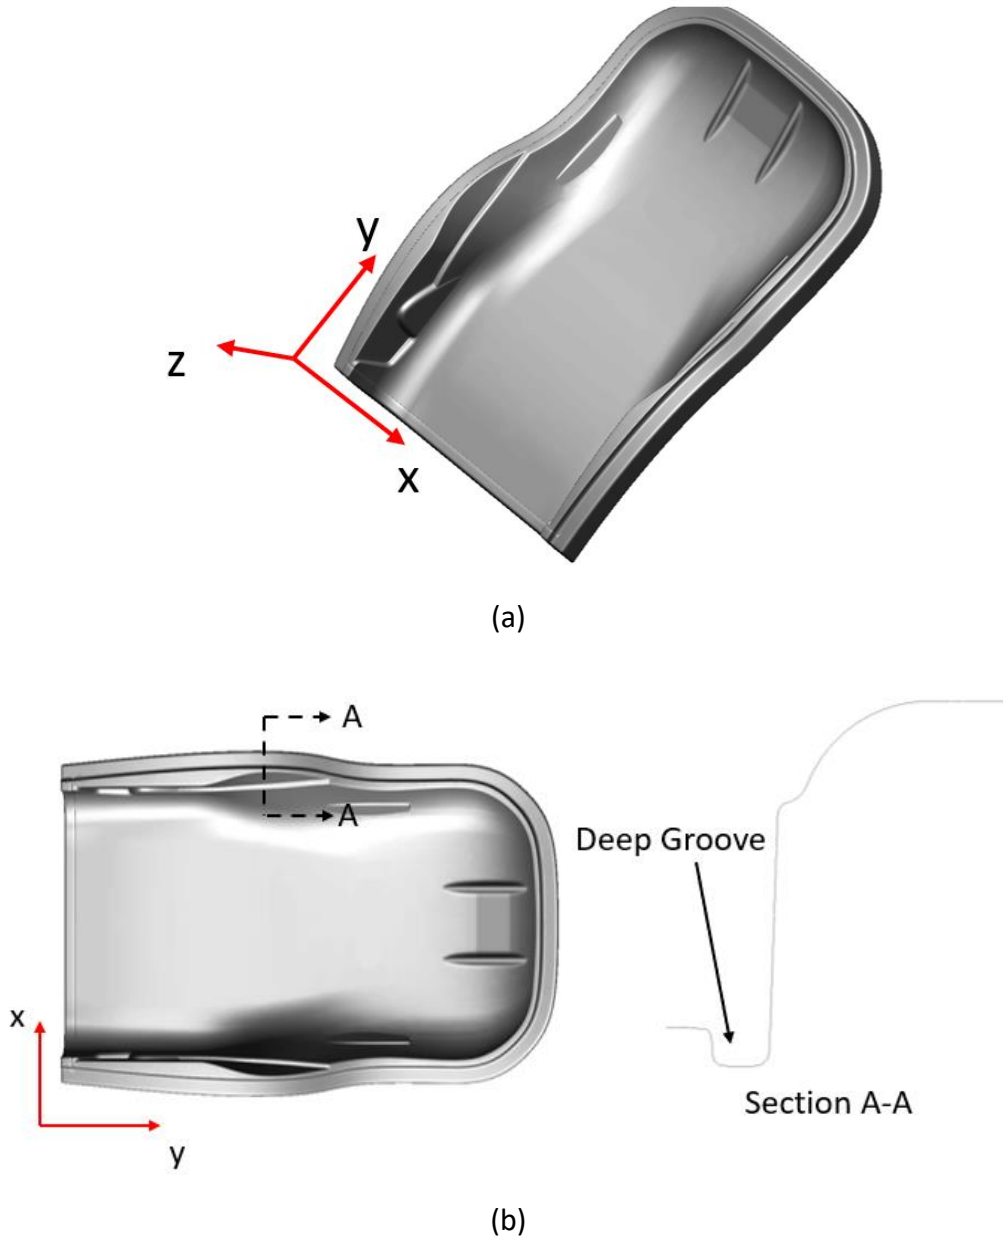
Seatback demonstrator geometry isometric view (a) and top and section view (b)
